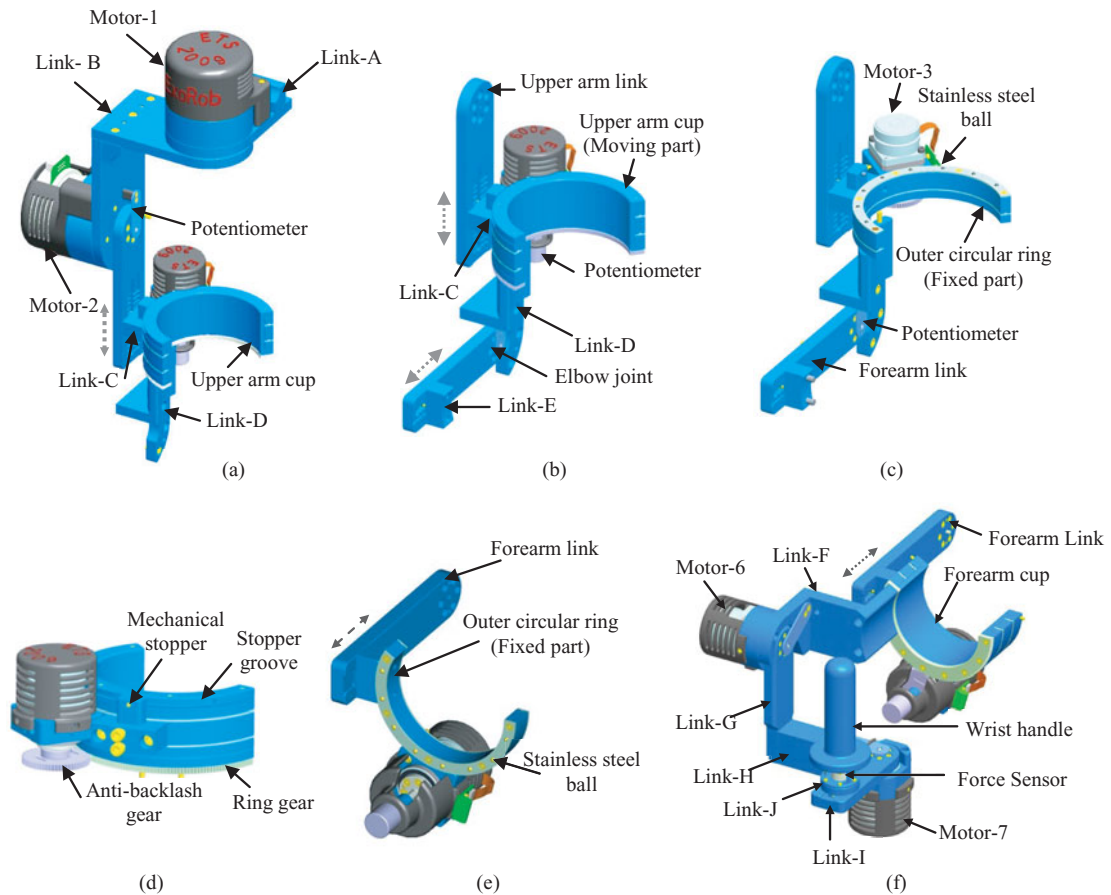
(Colour online) (a) Shoulder motion support part; (b) Internal/external rotation support part (when elbow motor is unplugged from elbow joint); (c) showing custom-made, open-type bearing when upper arm cup is not assembled; (d) actuation mechanism for shoulder joint's internal/external rotation; (e) forearm motion support part (when the forearm cup is not assembled); (f) wrist motion support part (2 DOFs).
